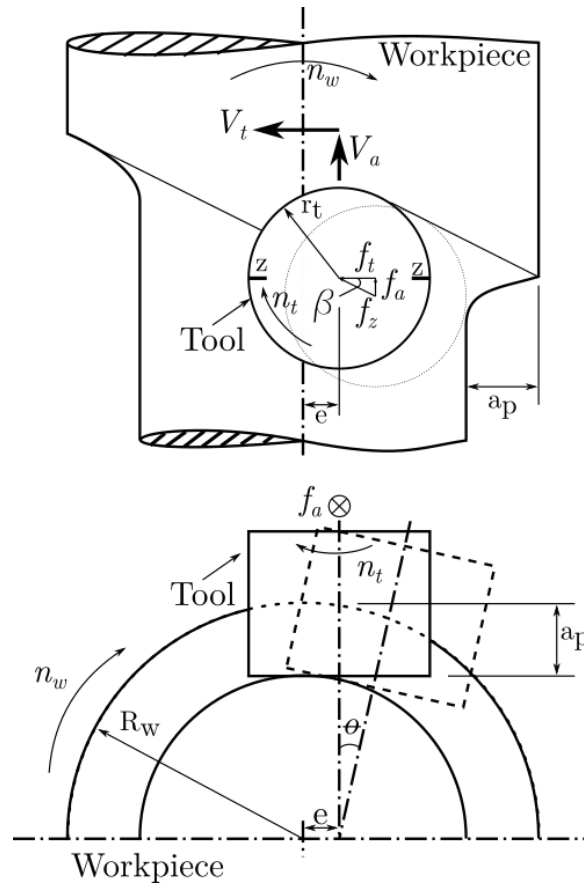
Orthogonal eccentric turn-milling kinematics. (R_w) Workpiece radius, (n_w) Workpiece rotational speed, (r_t) Tool radius, (n_t) Tool rotational speed, (f_a) Axial feed, (a_p) Depth of cut, (z) Number of cutting edges, (e) Eccentricity.
